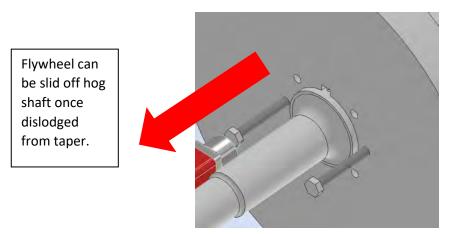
Tightening Bolts to Remove Flywheel (BH)
